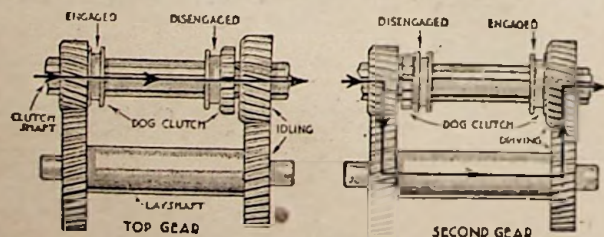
A top gear and "silent second" gear assembly with dog clutch control. In the synchro-mesh system clutches are used as well as dogs.
